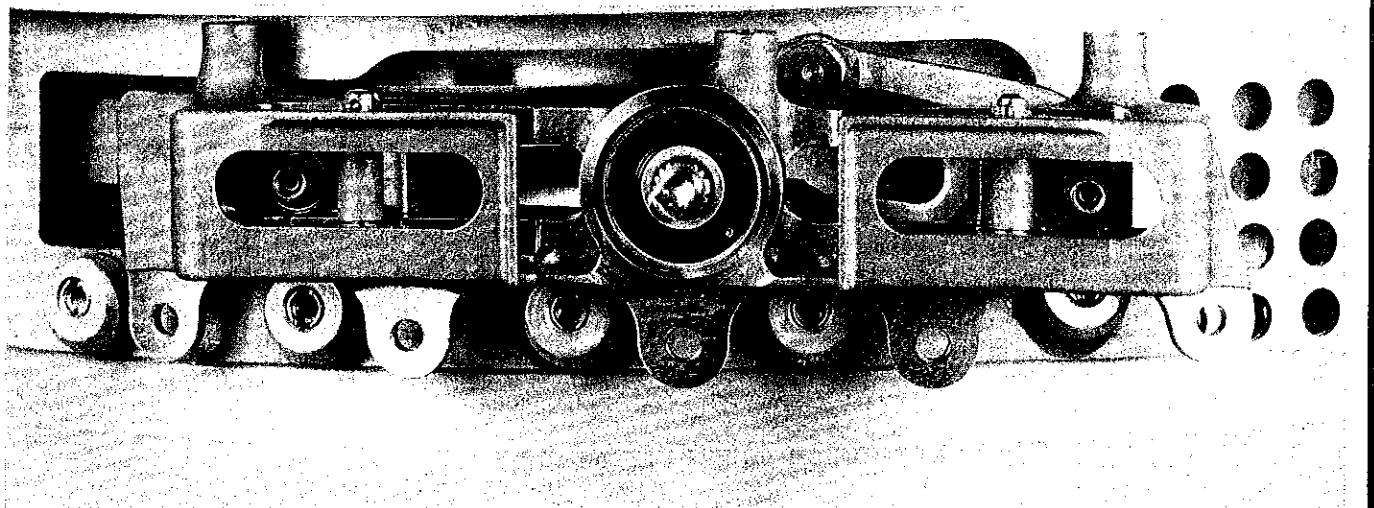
C-3. Installation of Bleed Valve Lever Assembly into Inlet Case
